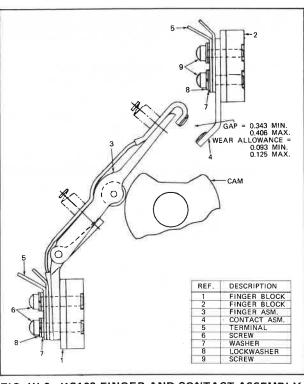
KC108 FINGER AND CONTACT ASSEMBLY.
